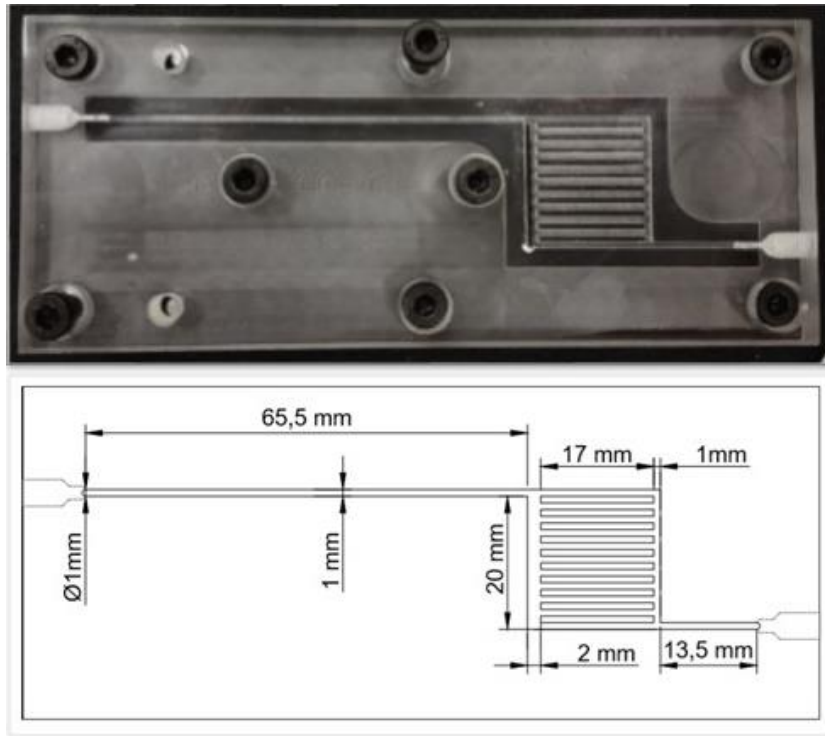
Top view and CAD drawing of the straight parallel channels micro-cell type-I.
